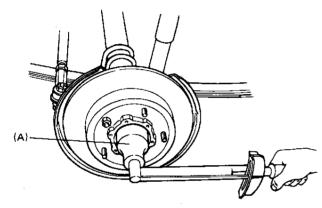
Special Tool (A) (Front Wheel Bearing Nut Socket Wrench 09941-58010)
